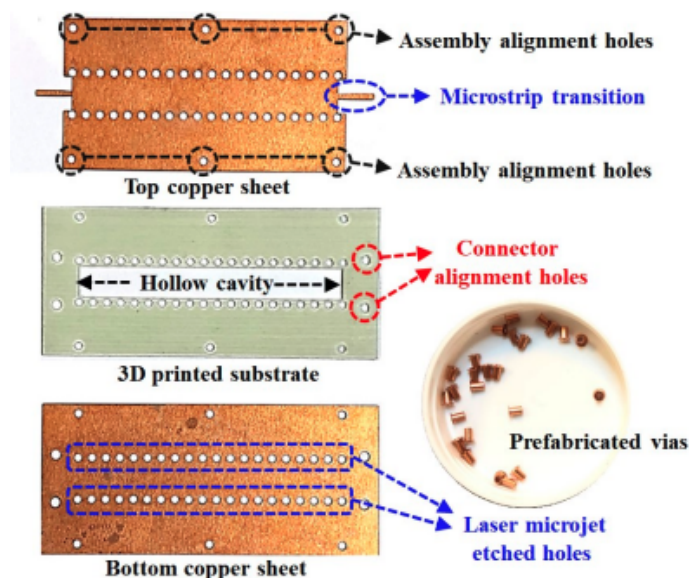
Fabricated HSIW prototype before assembly, which consists of the top copper sheet, 3D printed substrate, the bottom copper sheet and prefabricated vias
